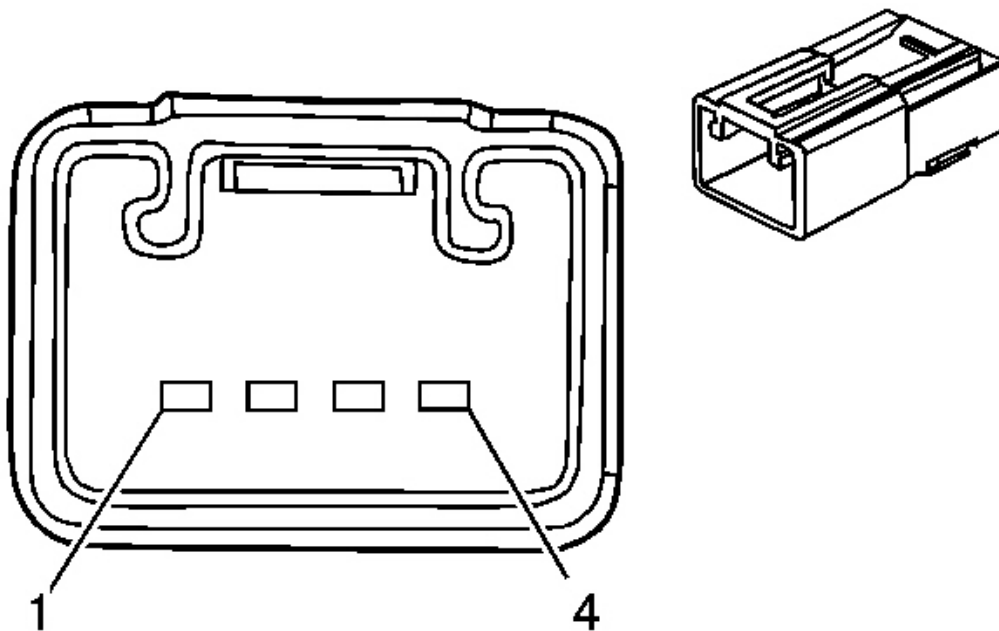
Passenger Side Outside Rearview Mirror Connector End View
